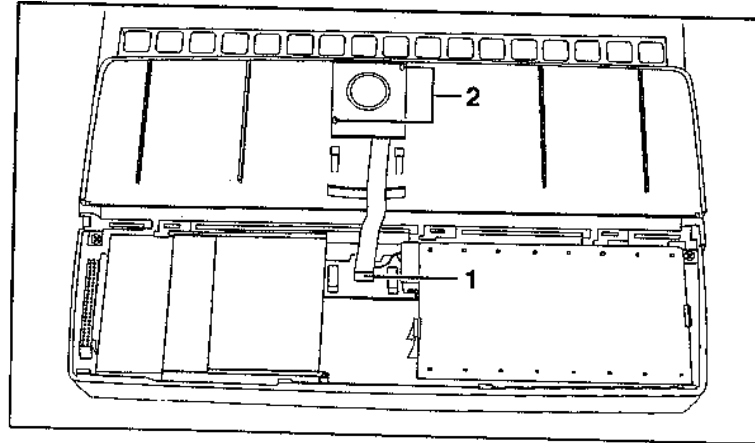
Trackball Module Disassembly/Reassembly
